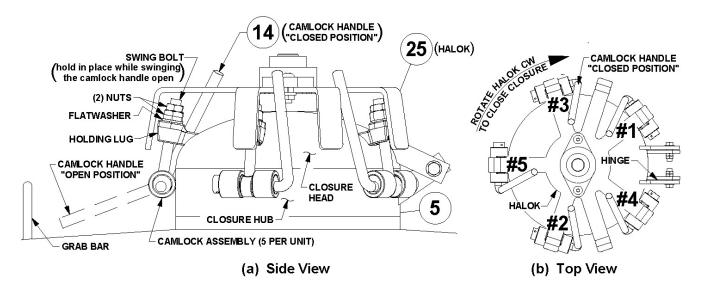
Bulk Abrasive Blaster Closure Assembly
